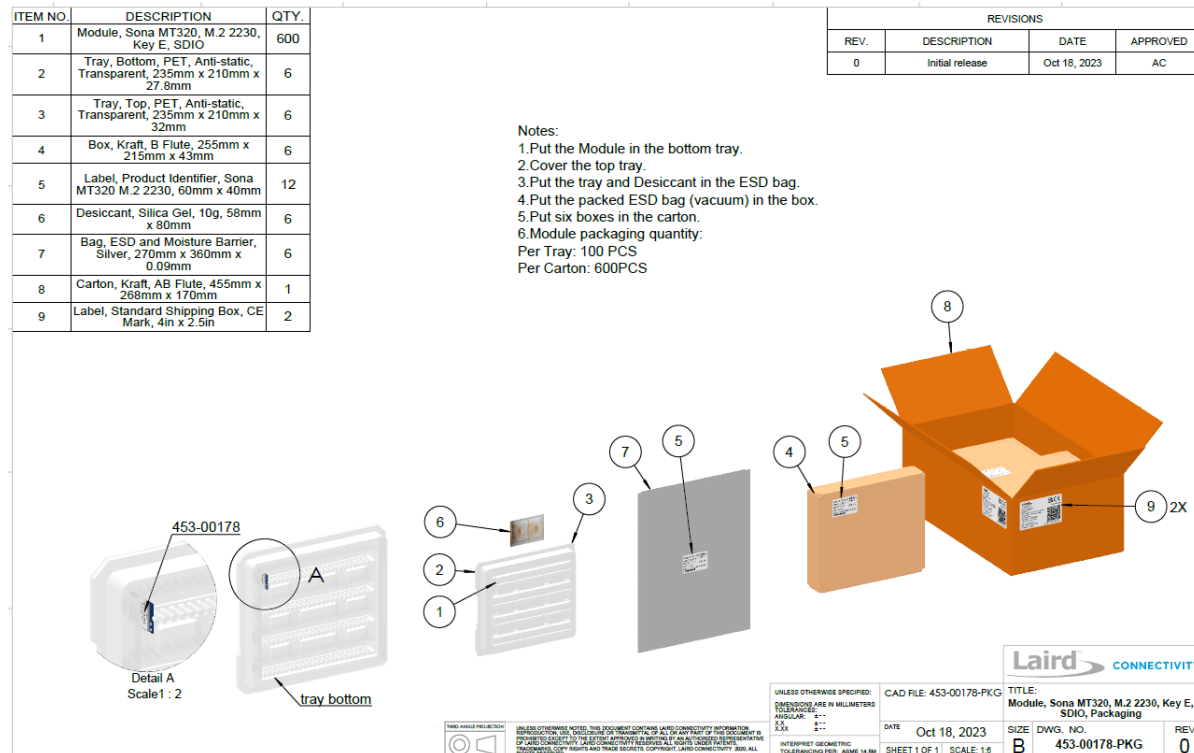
Sona MT320 M.2 2230 Packaging Process, 453-00178-PKG
